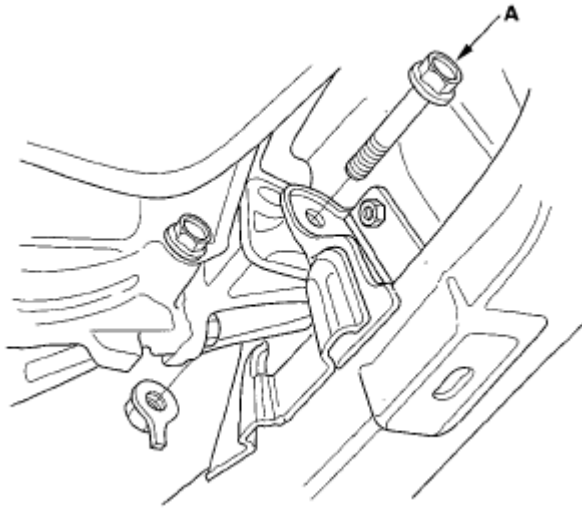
Identifying Front Engine Mount Bracket Bolt
